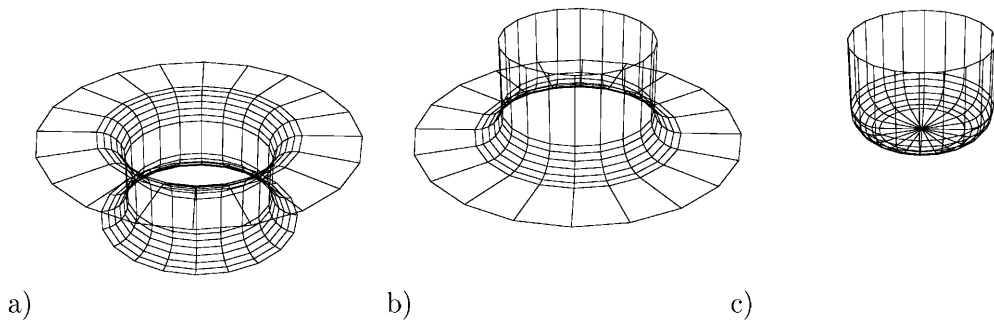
c. Tools for deep drawing process. a) Die, b) holder and c) punch
